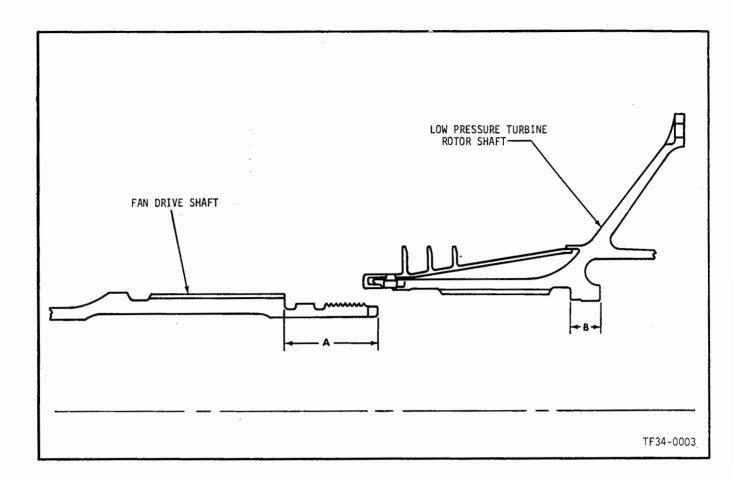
Low-Pressure Turbine Rotor Seating Dimensions - Before Installation
